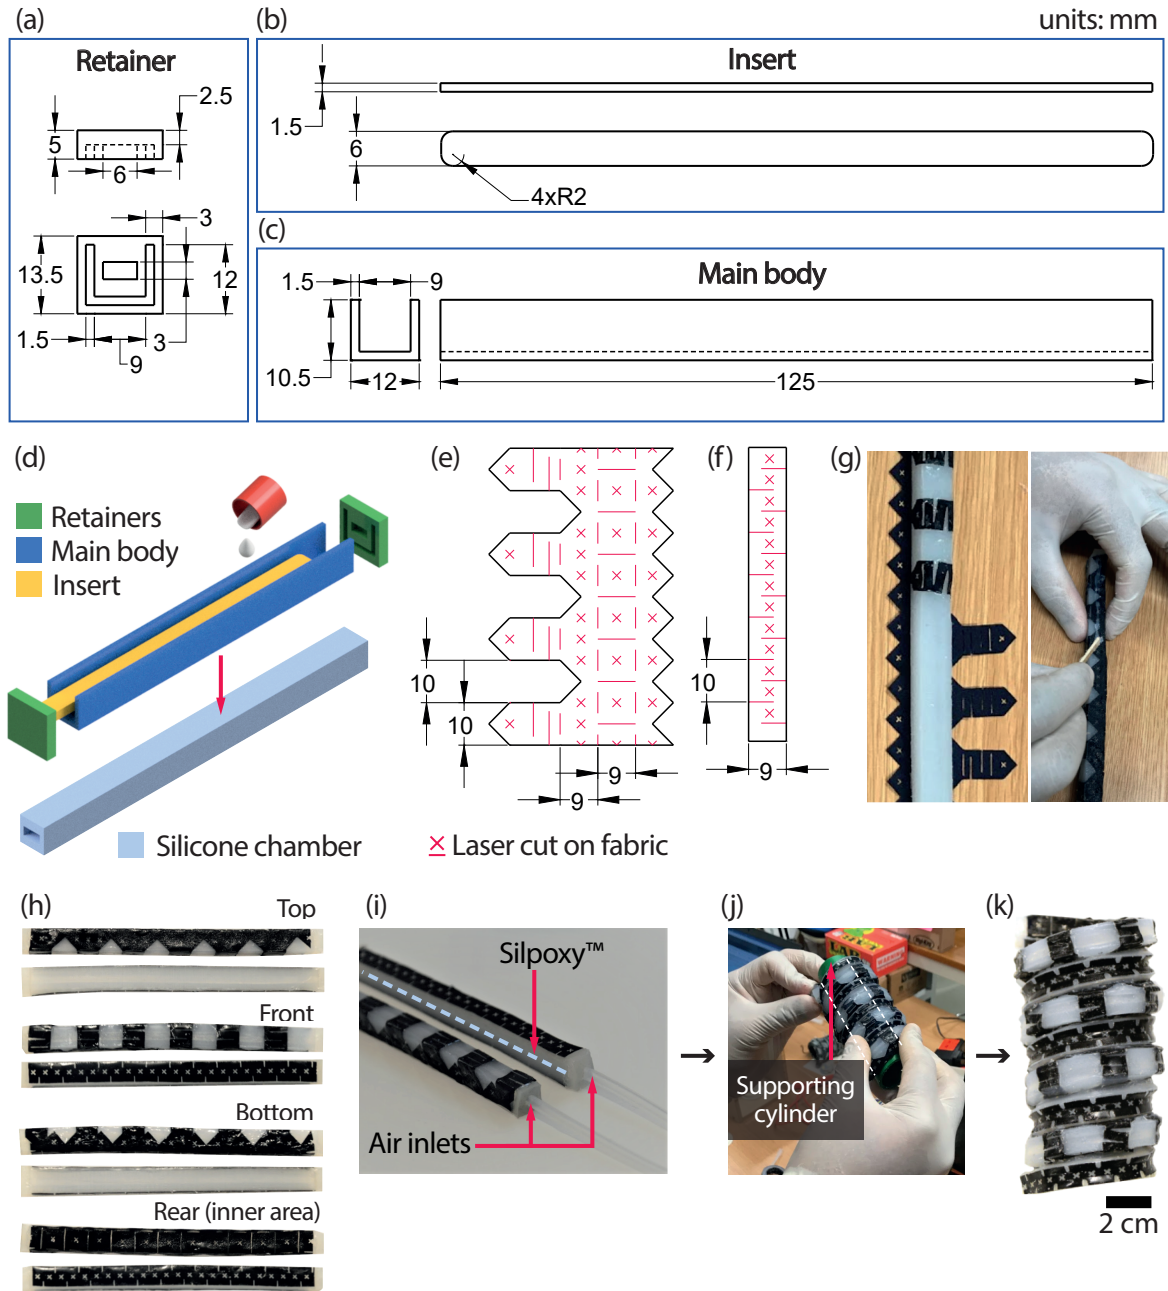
SoPHIA's fabrication procedure. (a) Dimensions of mold components: retainer, (b) insert and (c) main body. (d) Explosive view of the mold components and isometric view of the resulting silicone chamber. (e) Section of the constraints design for the RAC and (f) AAC. (g) Embedding of the constraints into the silicone chamber. (h) Different views of the RAC and AAC sections after embedding the polyester constraints with respect to their final configuration in SoPHIA. (i) Isometric detail of the RAC and AAC showing where the Silpoxy™ is applied to bond both chambers and where the air inlets are placed. Given that SoPHIA relies on only two chambers that shape the whole actuator's body, only two air inlets are needed, one per chamber. (j) The constrained soft pneumatic strands after being coiled around a cylindrical support and being held for 12 minutes until the Silpoxy™ cures. Then, we removed the cylinder. (k) The resulting SoPHIA.
